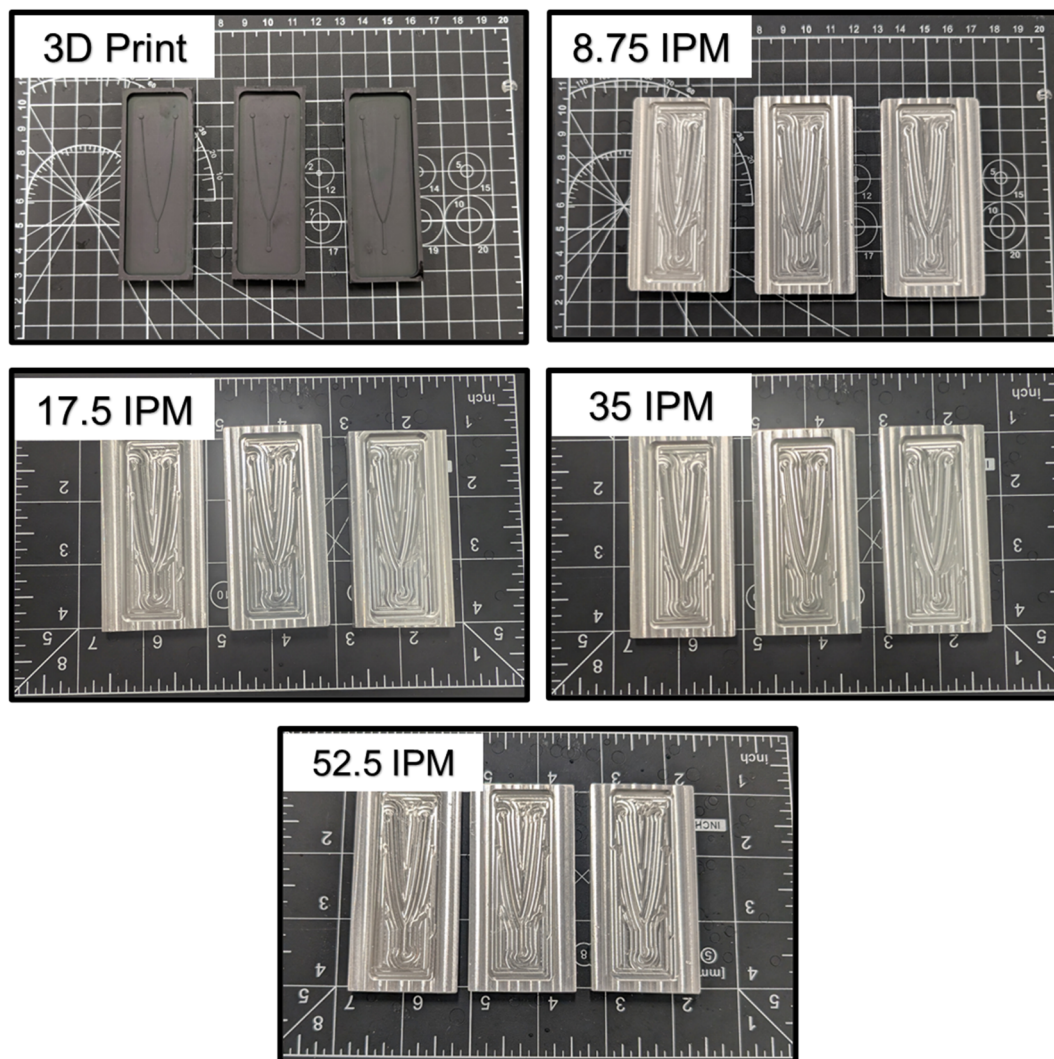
Pictures of 3D printed and CNC machined microfluidic splitter master molds. Top view pictures of 3D printed, and micromilled microfluidic splitter master molds fabricated using a form 3 SLA printer and Haas CM-1 compact mill correspondingly. Micromilled master molds were fabricated using increasing feeding rates (8.75, 17.5, 35, and 52.5 inches per minutes [IPM]) using a titanium coated 1/8" high speed steel flat end mill.
